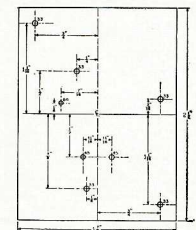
Drilling details on the circuit board chassis. The board is 1/16 inch thick and preferably with copper on both sides. If just one side is copper, drill as shown from the copper side. The numbers by the side of each hole indicate the drill gauge.
